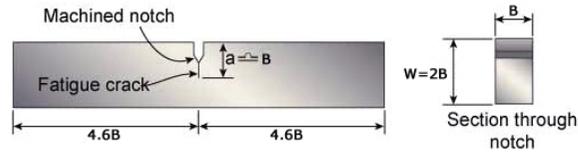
Fracture mechanics SENB specimens with  $B=15$  mm
